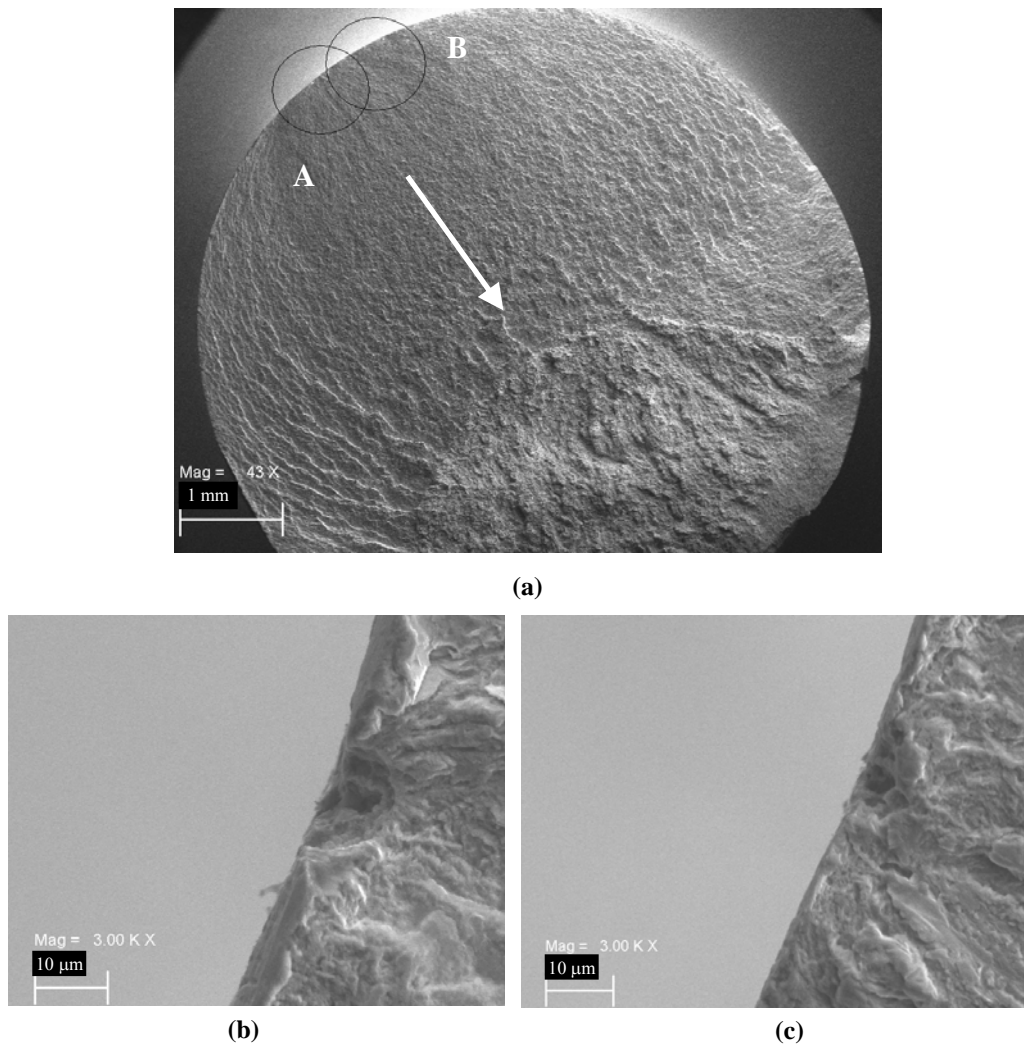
(a) Fracture surface overview of a coated specimen and higher magnifications of possible crack initiation areas (b) B and (c) A [3.21].
